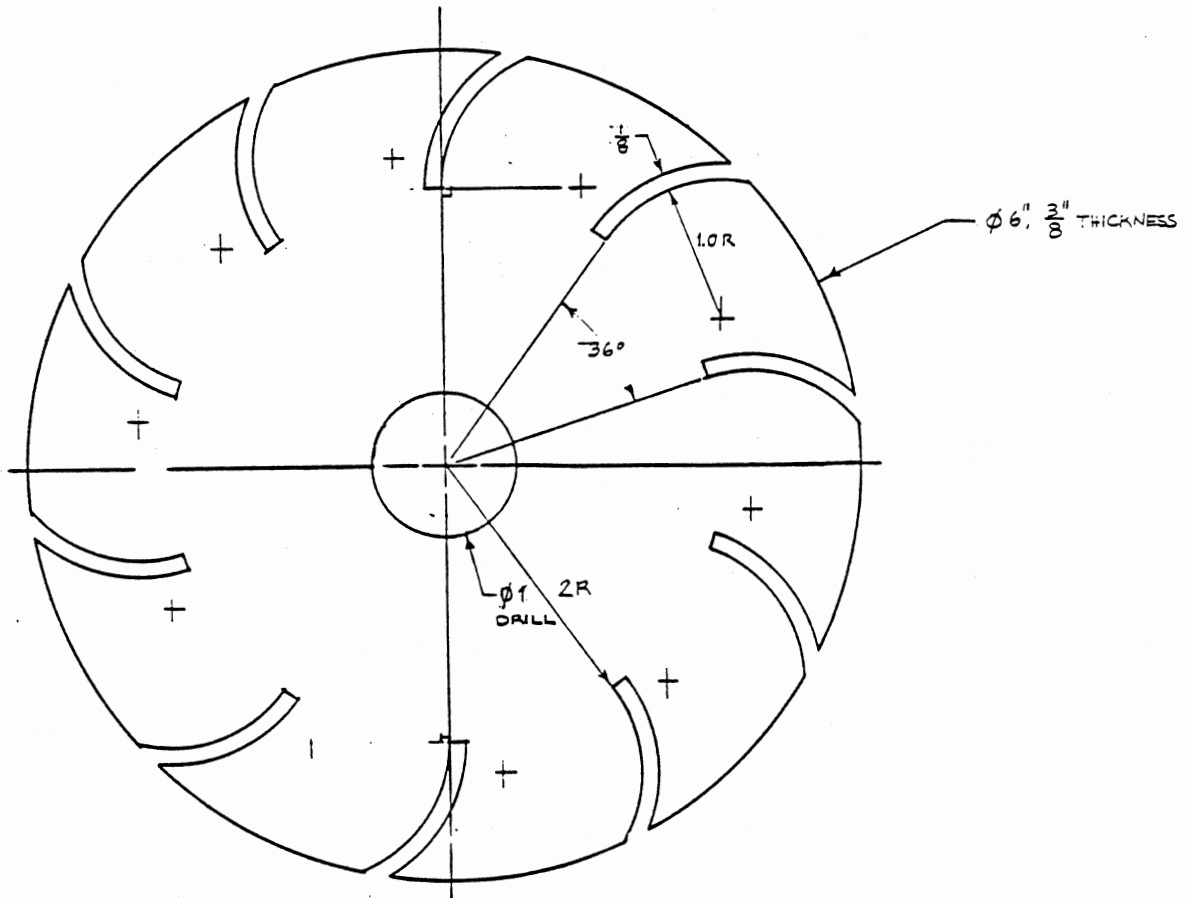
Plan for the Side Disk of the 10-Blade Runner
